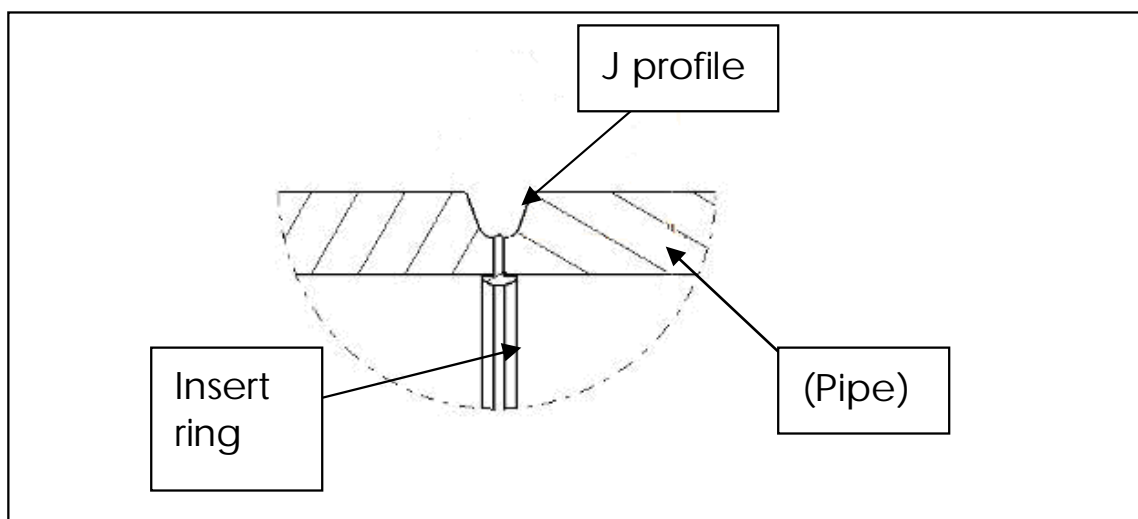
Insertion ring with J profile for improved weld penetration
